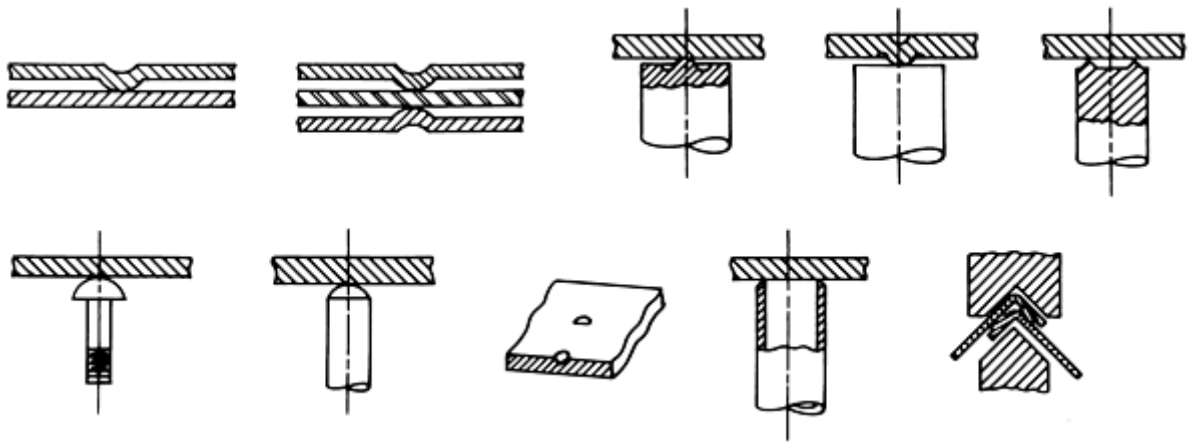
SCHEMATICS SHOWING SELECTED SETUPS WHICH CAN BE USED IN PROJECTION WELDING OPERATIONS
